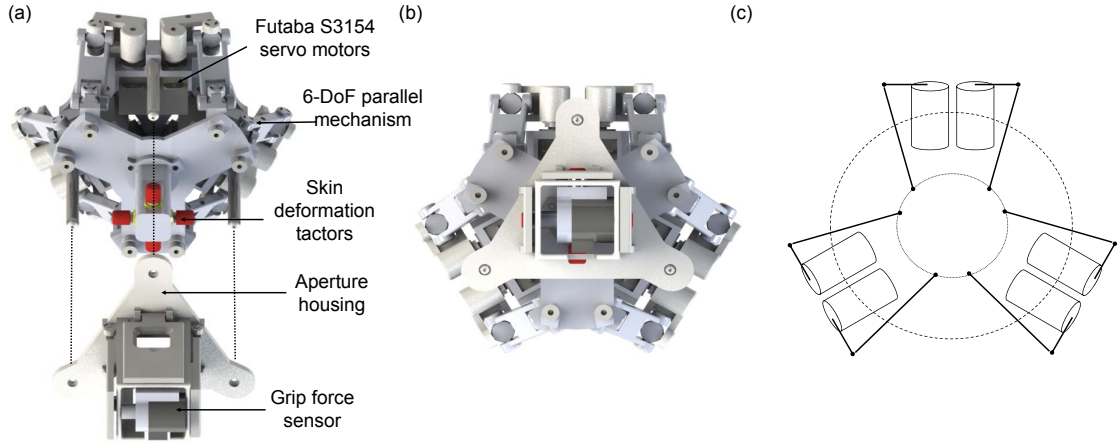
Design of the 6-DoF skin deformation tactile device. The device consists of a Hunt-Typed 6-Rotational-Universal-Spherical (6-RUS) parallel mechanism actuated by 6 servo motors. (a) Exploded view of the device, (b) assembled device, (c) kinematic diagram of the Hunt-Typed 6-RUS parallel mechanism.
